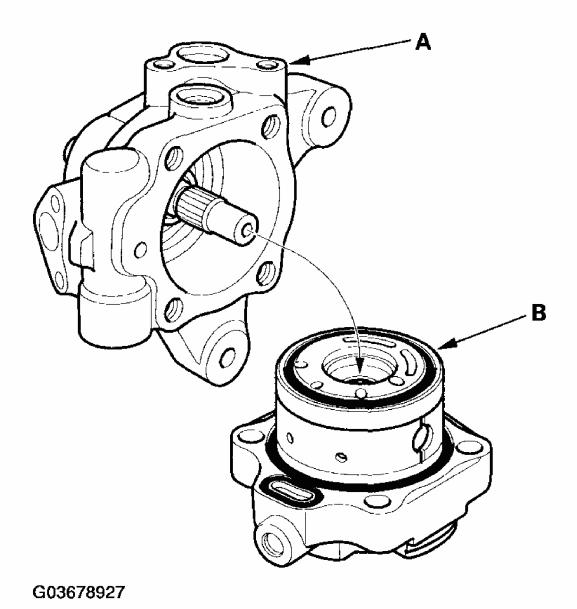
Installing Pump Housing Over Cover Assembly Courtesy of AMERICAN HONDA MOTOR CO., INC.
